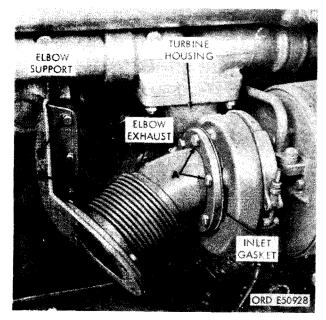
REMOVING ORINSTALLING TURBOSUPERCHARGE REXHAUSTEL BOW AND SUPORT (LATE MODEL ENGINES).
